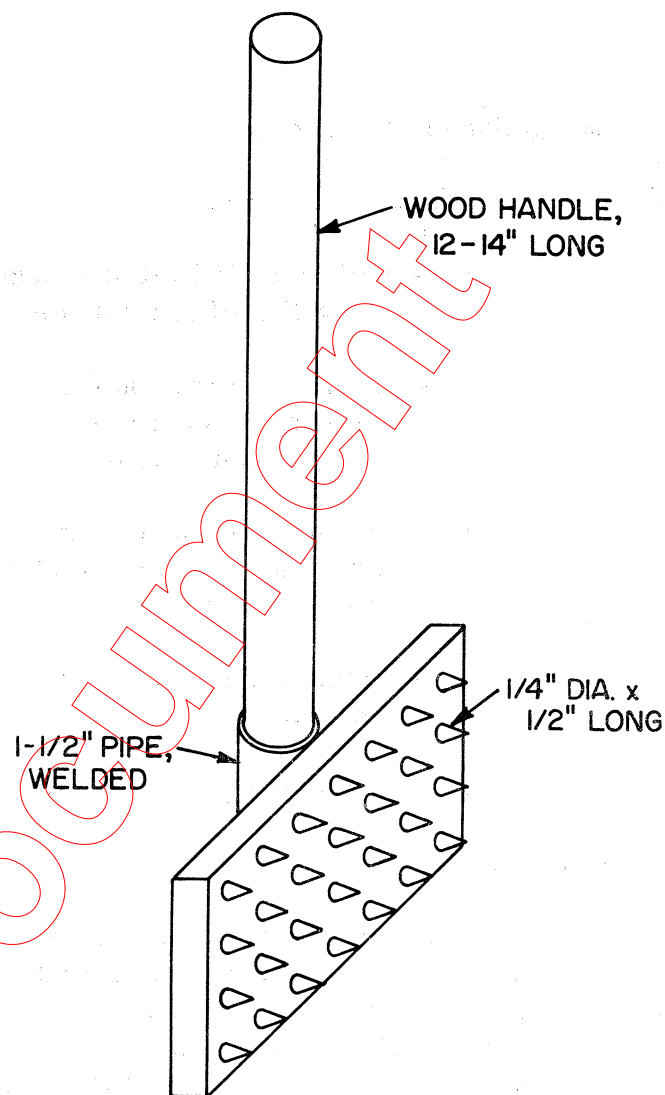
An incising tool made by inserting sharpened spikes which project 1/2 inch in holes drilled 3/4 inches apart in steel block 1/2" x 3" x 5". Weld may be used to fasten handle and to secure spikes from back side if holes are drilled completely through block.
